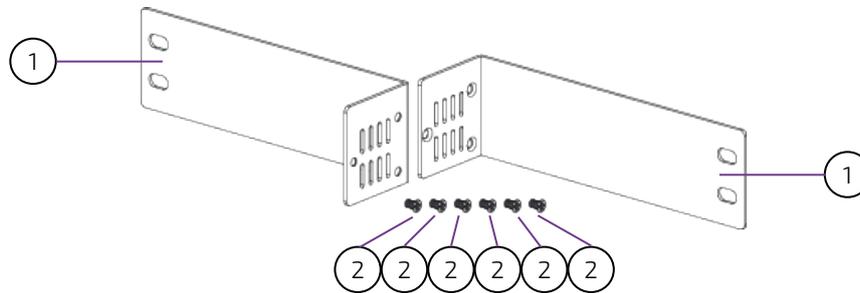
Securing the KBox N-120-ADN onto the mounting surface
